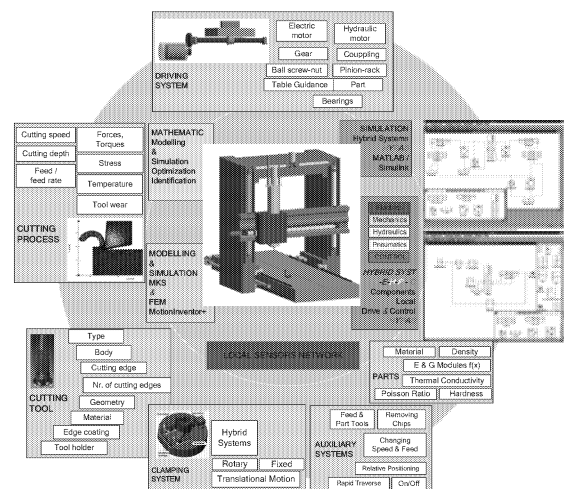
Subsystem Machine Tool in LSMS: Cutting; Cutting Tools; Devices; Parts; Driving & Control
